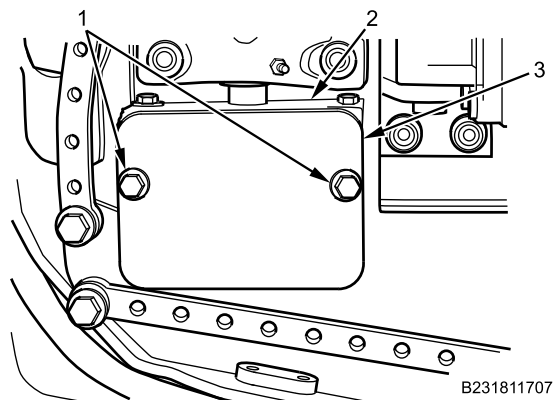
Inner Door Handle Shaft Cover Plate Installation.
